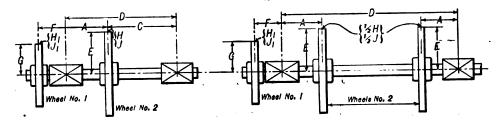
Fig. 29. NOTE—Use the larger shaft size obtained from wheel 1 or 2.
